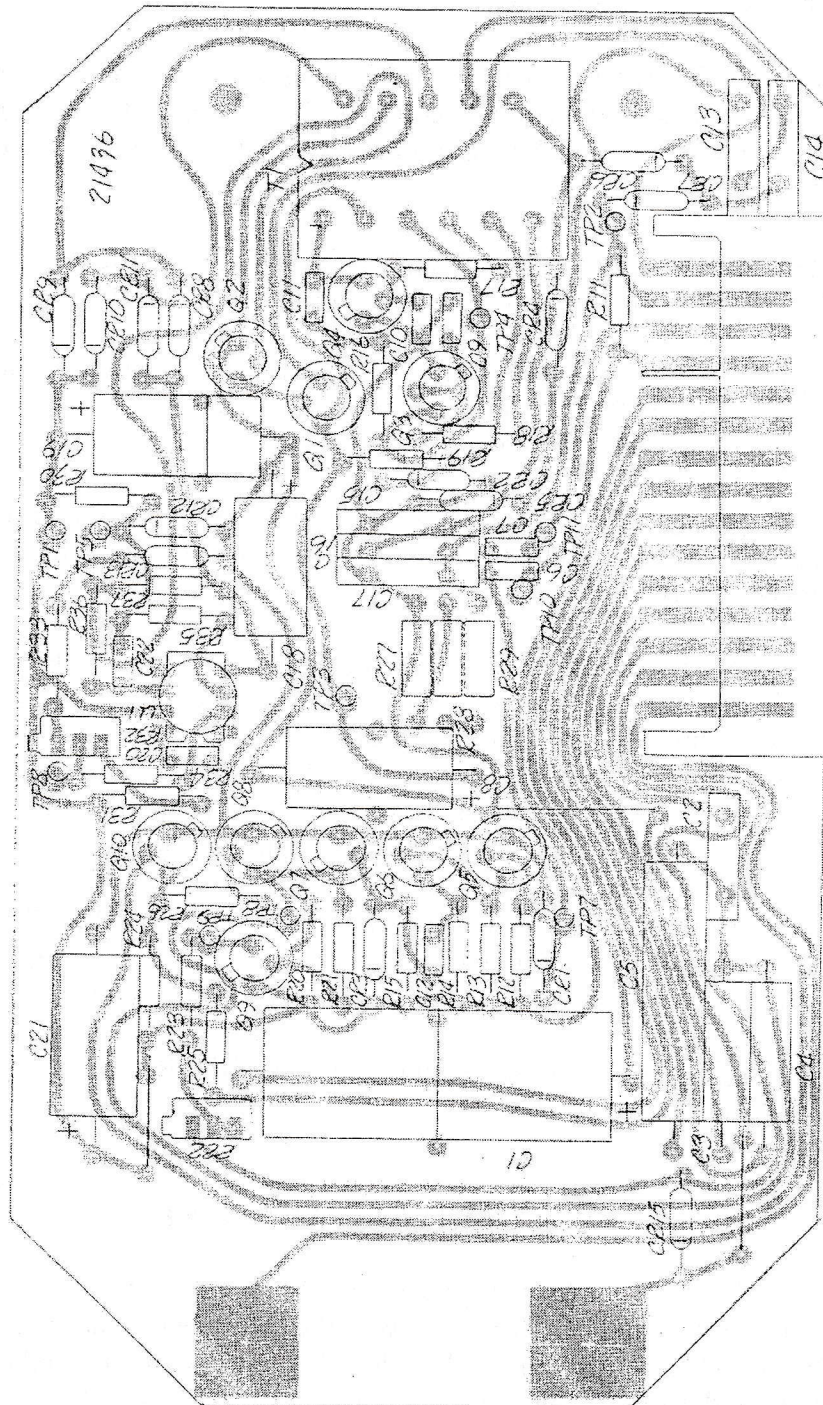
Parts Location, Printed Circuit Board Assembly
